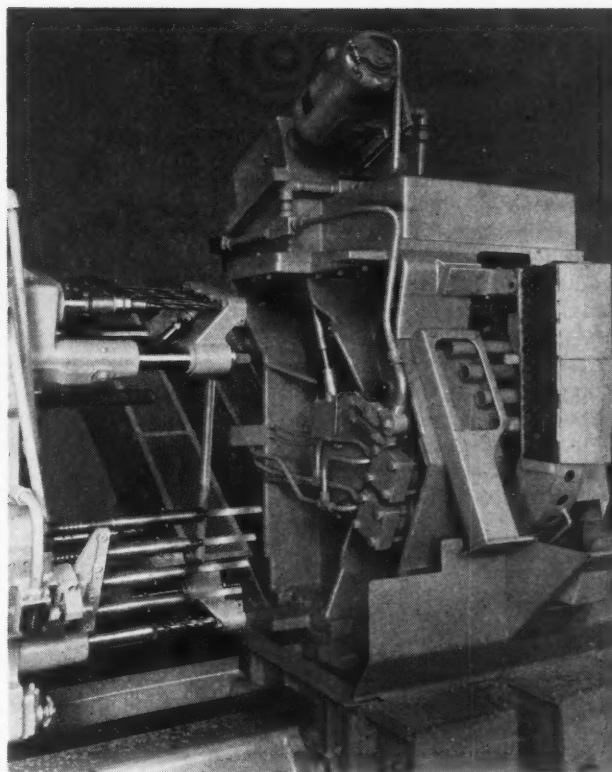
Close-up view of hopper-fed central indexing fixture of machine shown in Fig. 1
